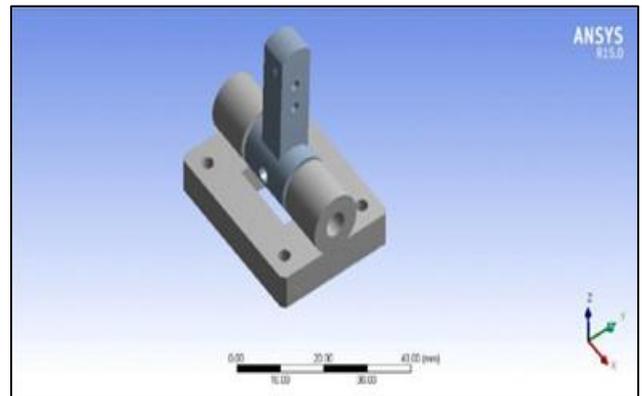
Modelled Steering Seat Base and Arm Assembly for PLA
